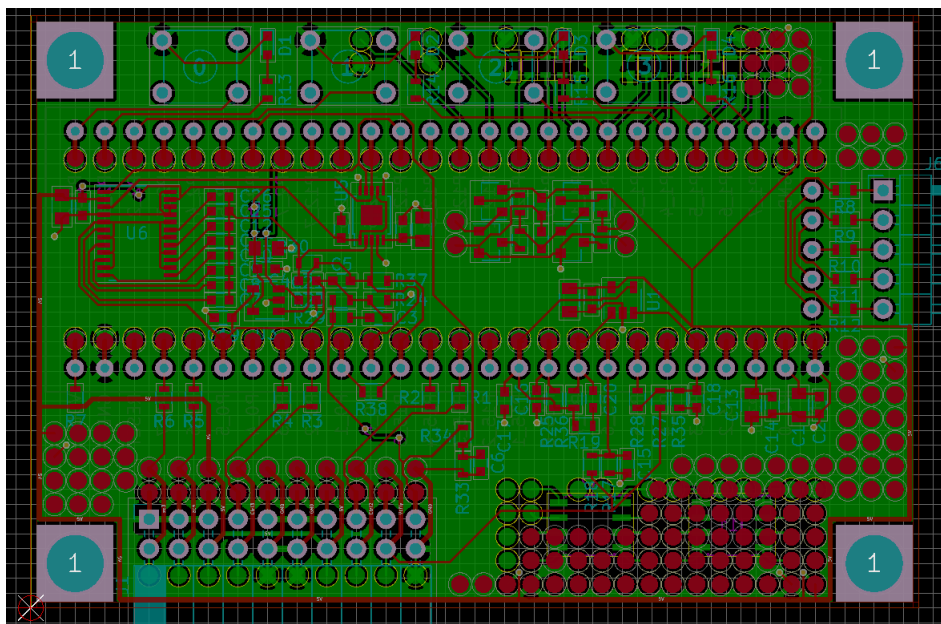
Top view of the layout for the control PCB in KiCAD.
